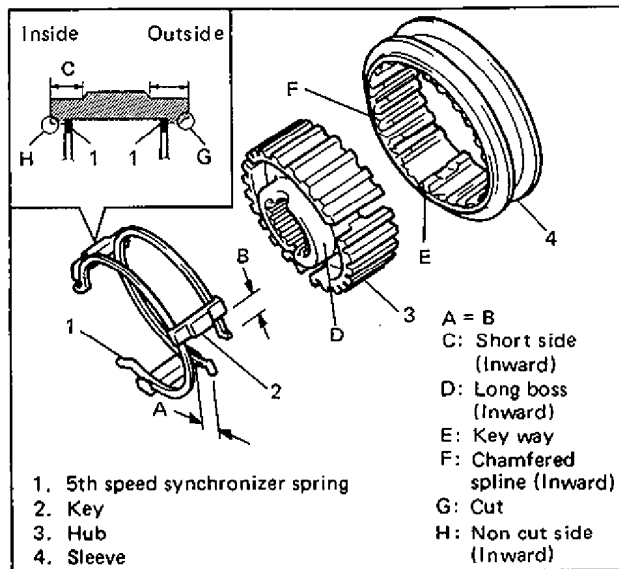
A-81 Assembling 5th Speed Sleeve & Hub
